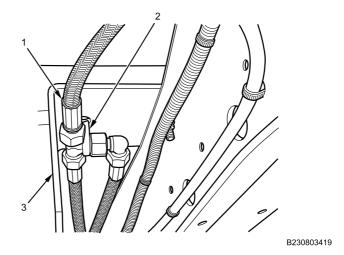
Air Brake Quick Release Valve Mounting Bracket.
